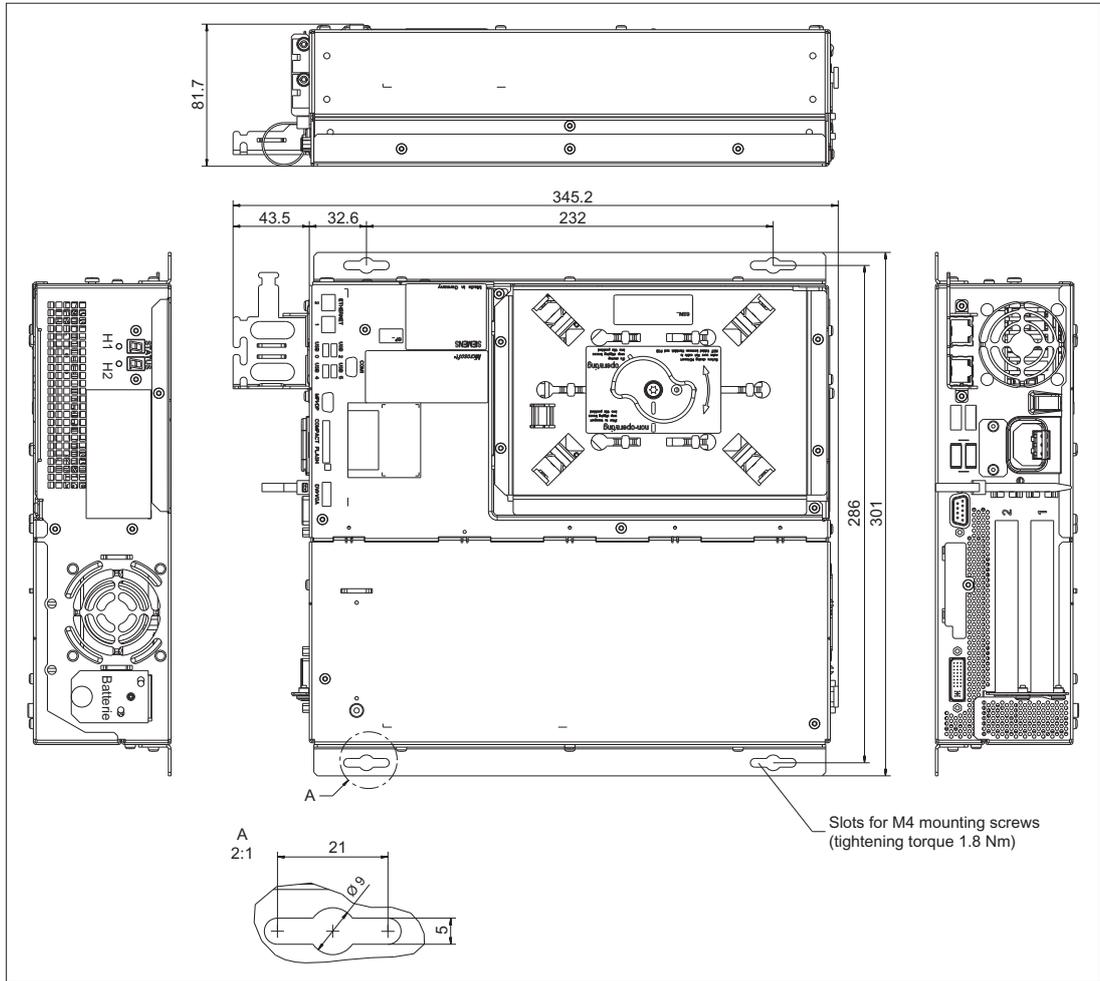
Dimension drawing, PCU 50.3 mounted flat
